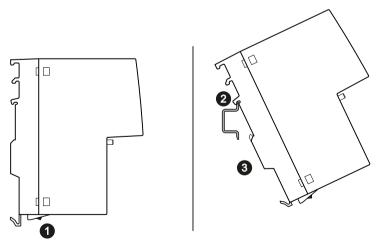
DIN rail mounting with securing bar in the wall mounting position.
